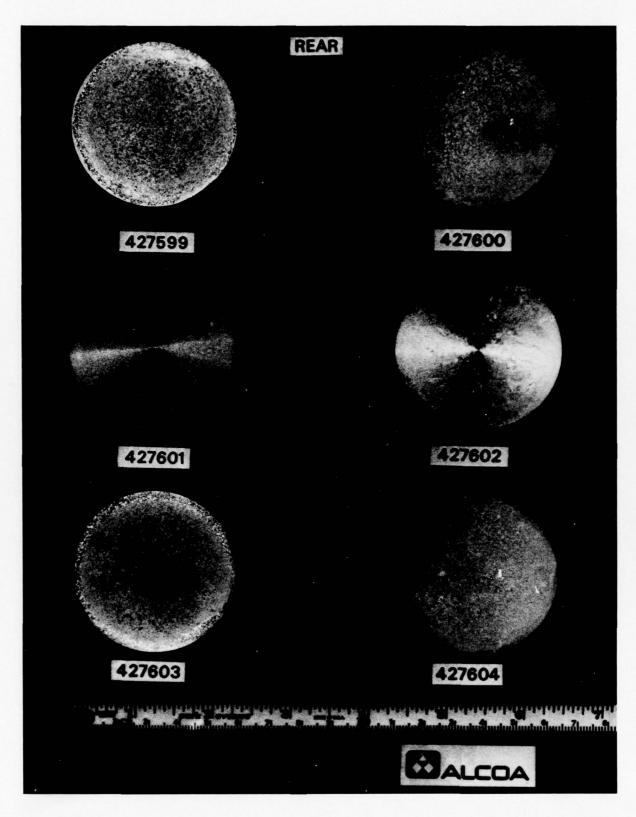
Etched Slices Removed from Rear of Phase II Al-Mg-Li Extrusions (S. Nos. 427599 through 427604).
